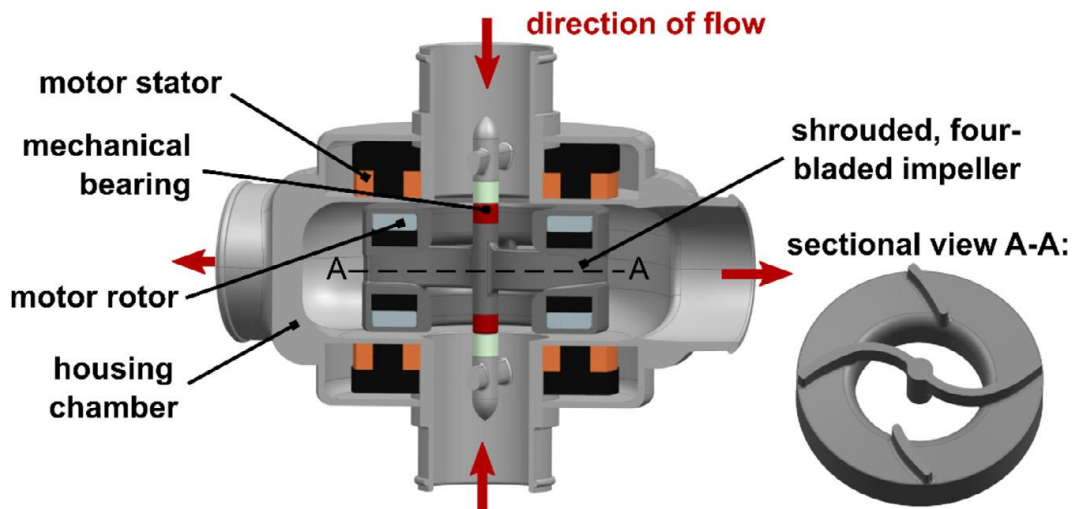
Cavopulmonary pump with two axial flux three-phase synchronous motors. Each motor consists of 12 coils and the rotor has 8 poles of surface-mounted permanent magnets. The impeller blade has a diameter of 19mm, sectional view A-A. Image courtesy (Granegger et al., 2019)
